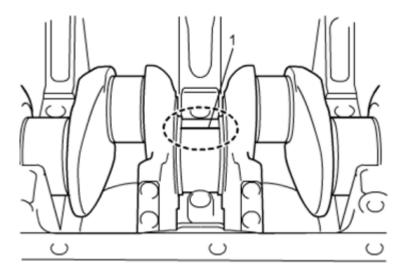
Identifying Plastic Gauge Courtesy of SUZUKI OF AMERICA CORP.
